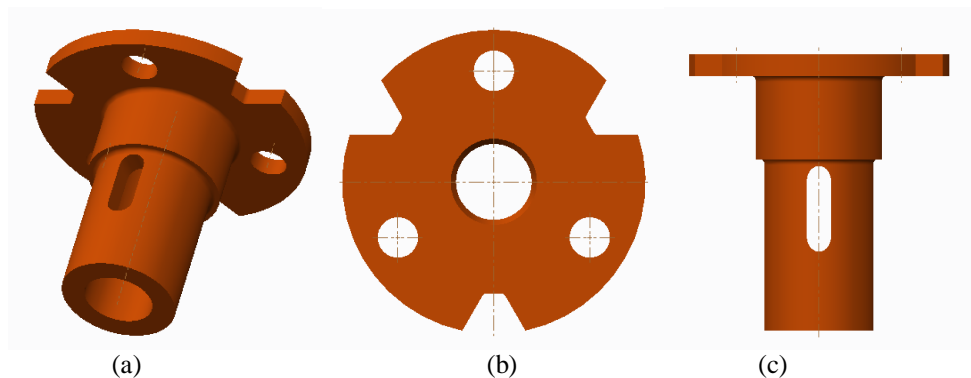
Creo model of flange-1 (a) slanted view (b) top view (c) front view
